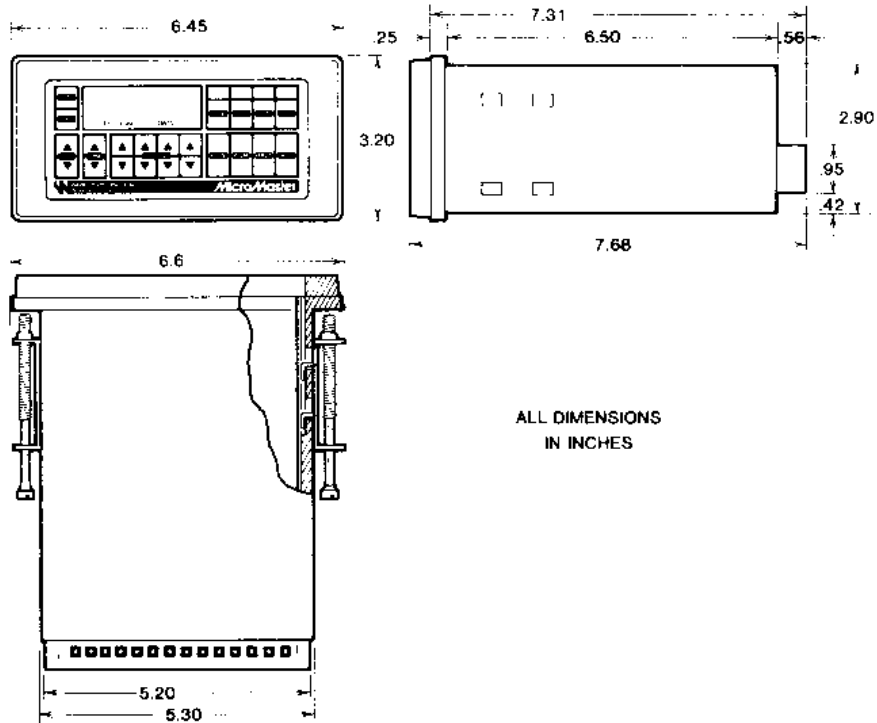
WP6200, WP6240 AND WP6300 DIMENSIONS
